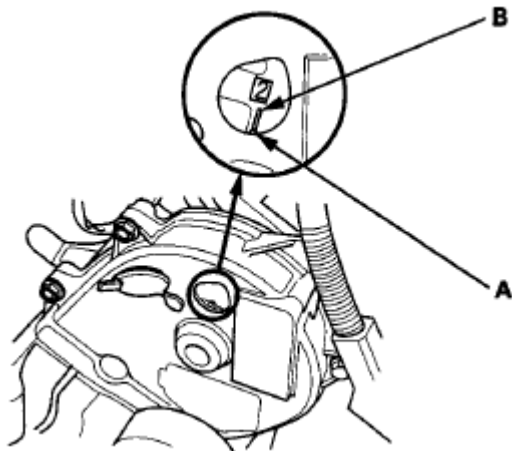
Aligning Pointer On Front Upper Cover With No. 2 Piston TDC Mark On Front Camshaft Pulley
